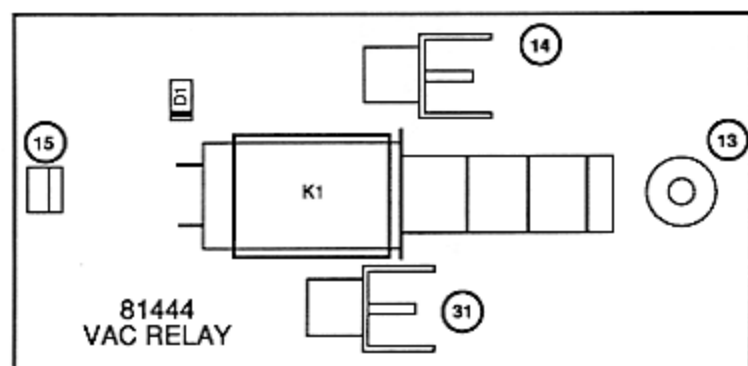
81444 VAC RELAY BOARD COMPONENT LAYOUT
